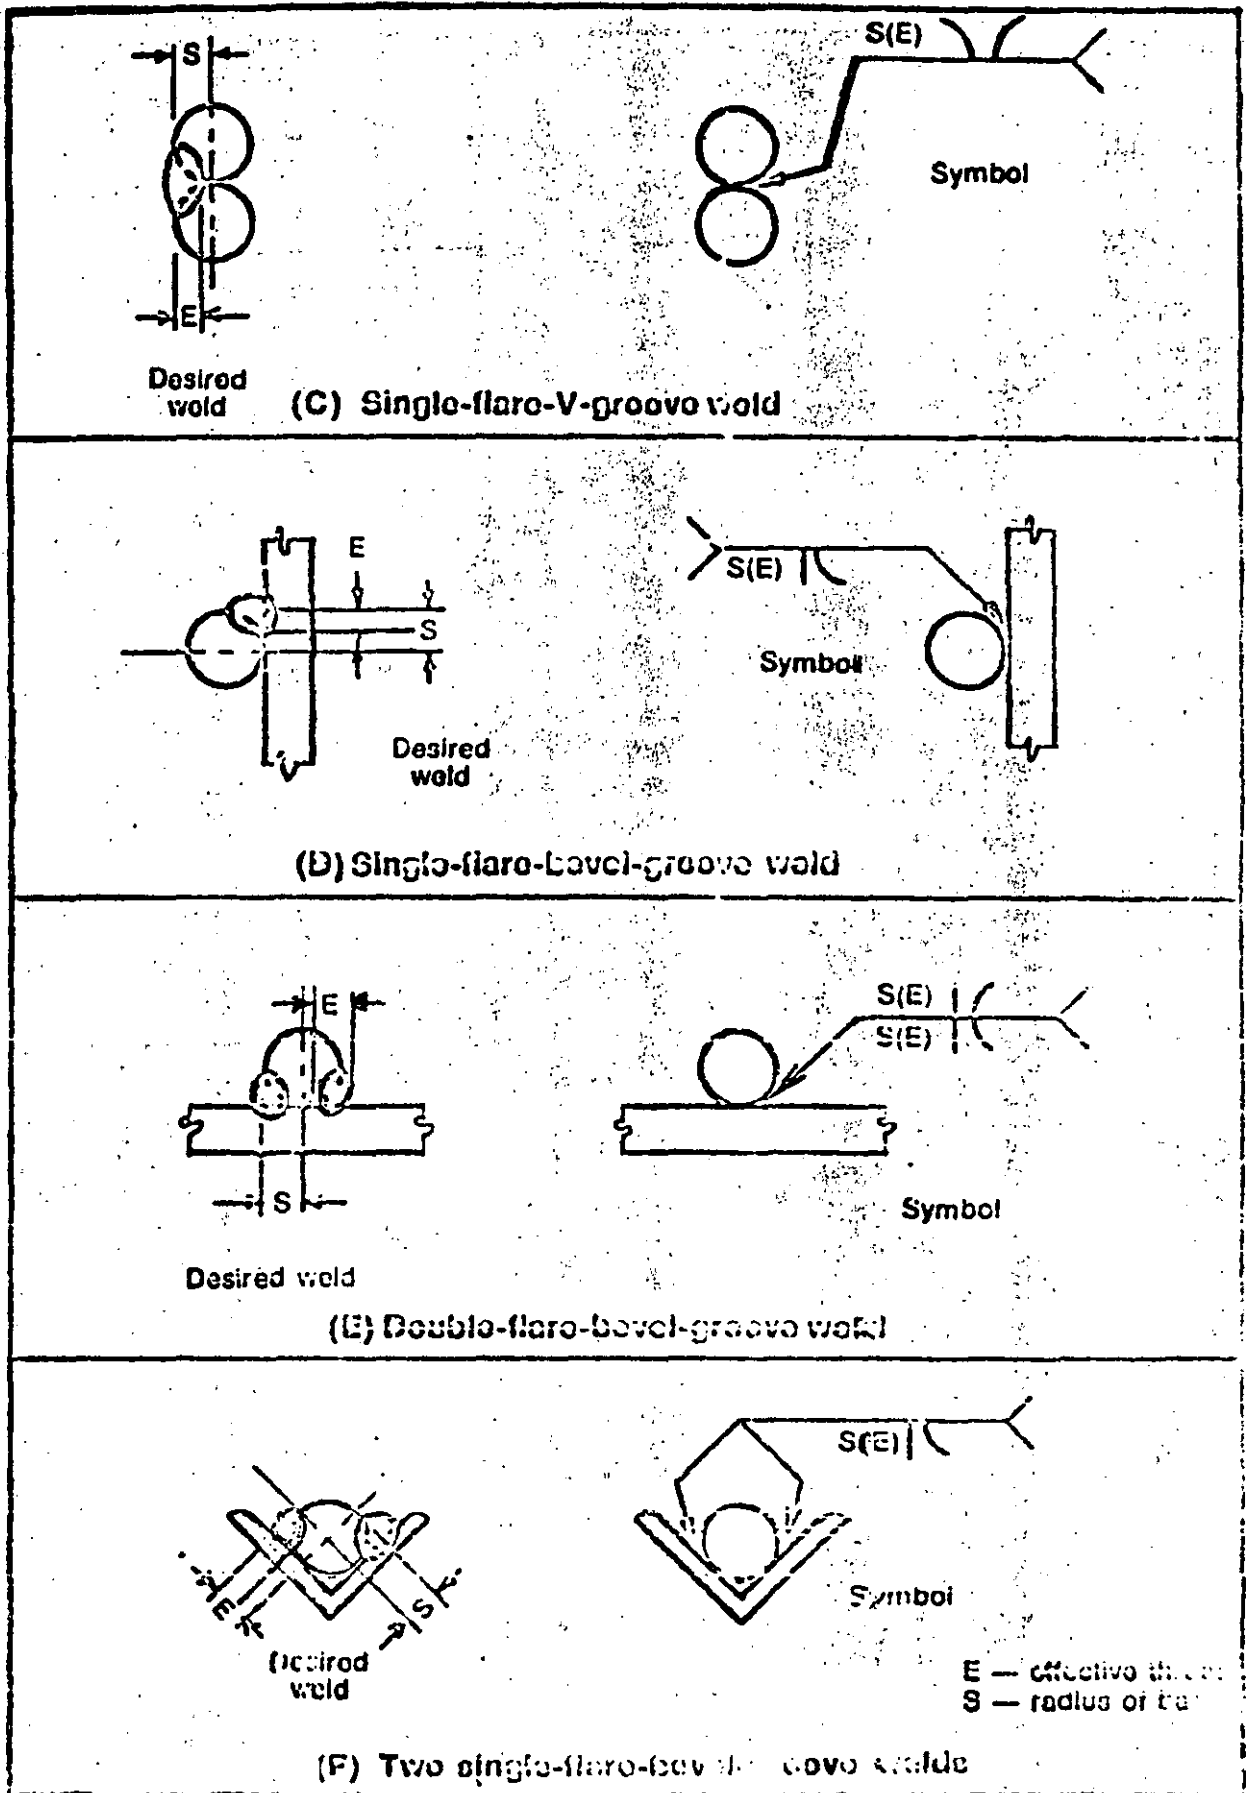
(cont.) — Application of flare-bevel- and flare-V-groove weld symbols
